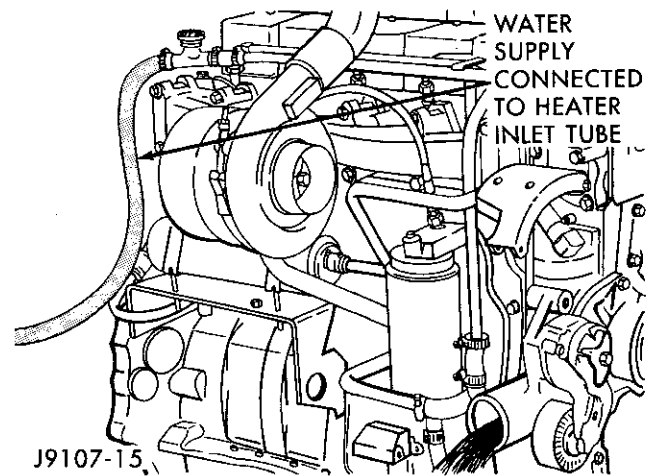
Typical Reverse-flushing—5.9L Diesel
